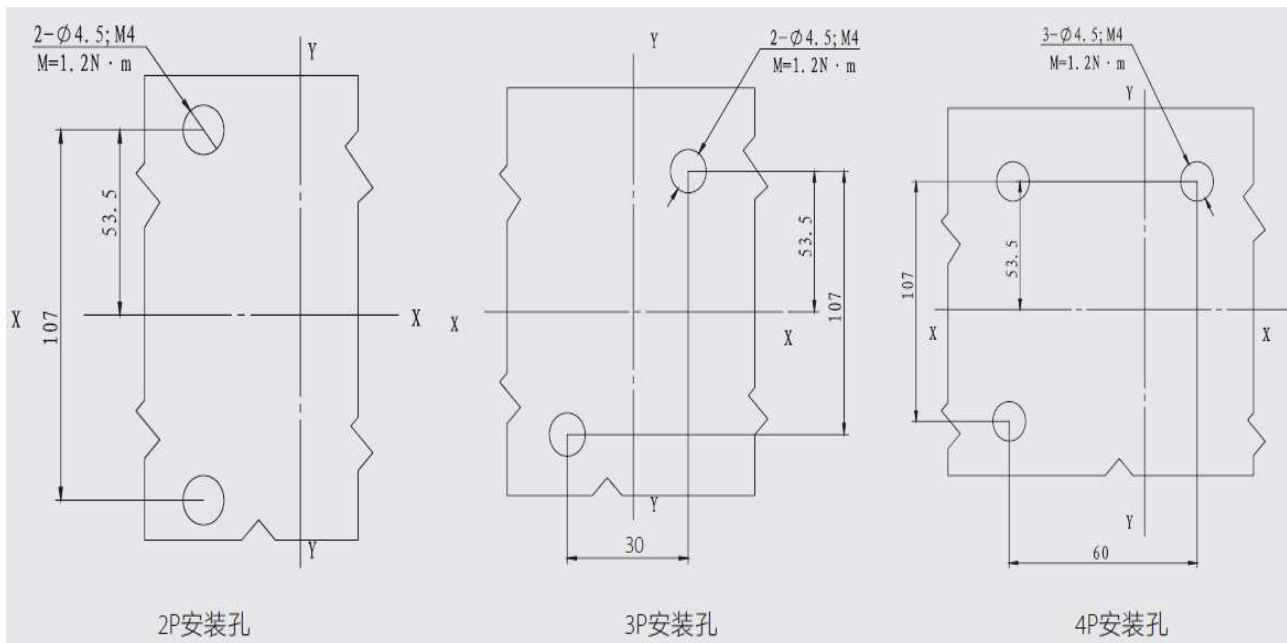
2P 3P 4P Installation dimension drawing of front board wiring products
